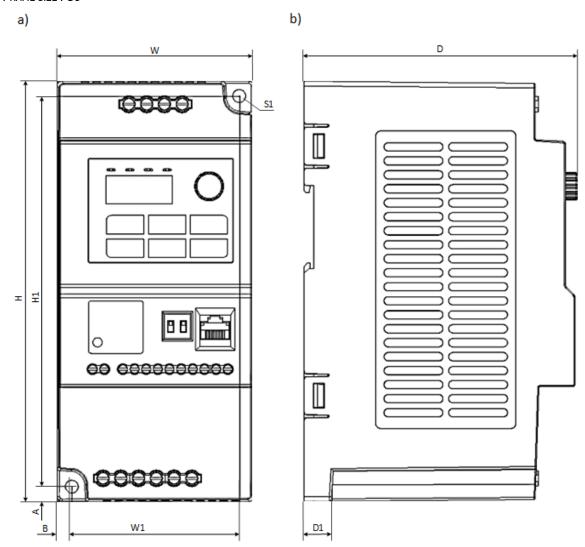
Four-view drawing – FS3: a) Front view b) Side view
